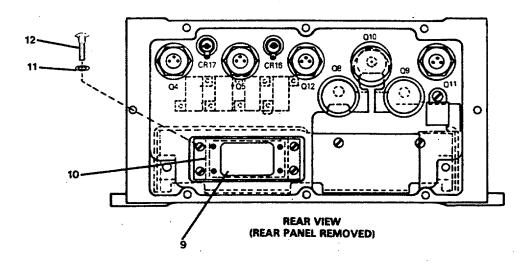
Gyro Control and Power Assembly Replacement.
